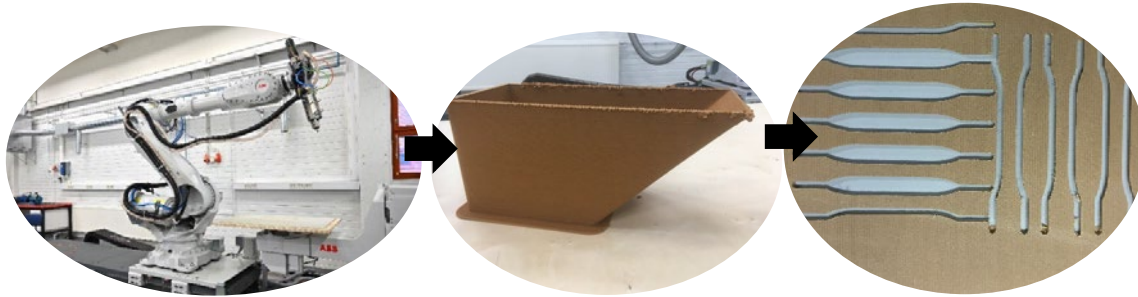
3D-printing extruder attached to robot (left), the model printed to prepare test specimens (middle) and CNC machined test specimens (right)
